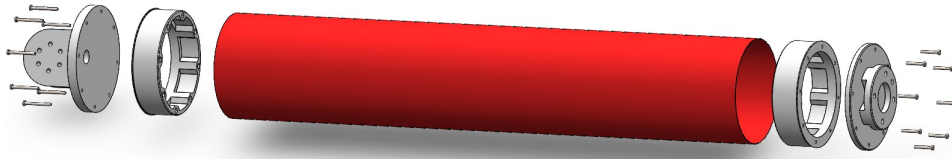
Exploded view drawing of the inflatable link 2 prototype.
